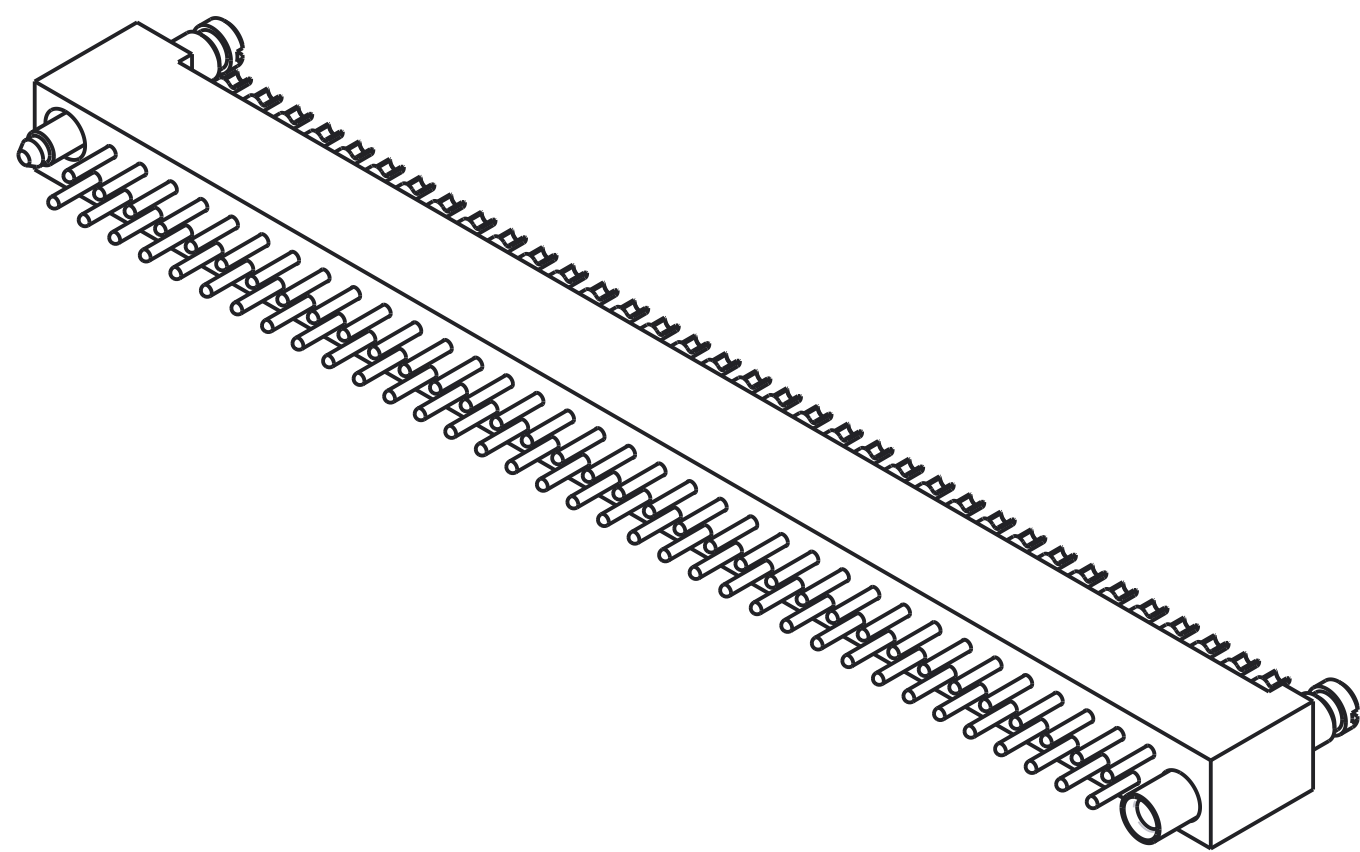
PLUG CONNECTOR, SOLDER CUP PIN CONTACTS
